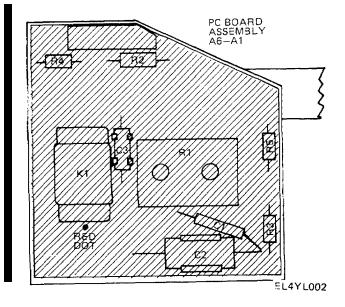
Terminal Board Assembly A6 (PP-6224A/U) parts location.
